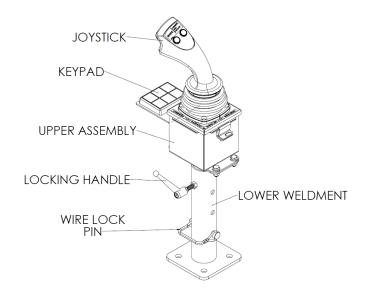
A - PVG JOYSTICK ASSEMBLY
